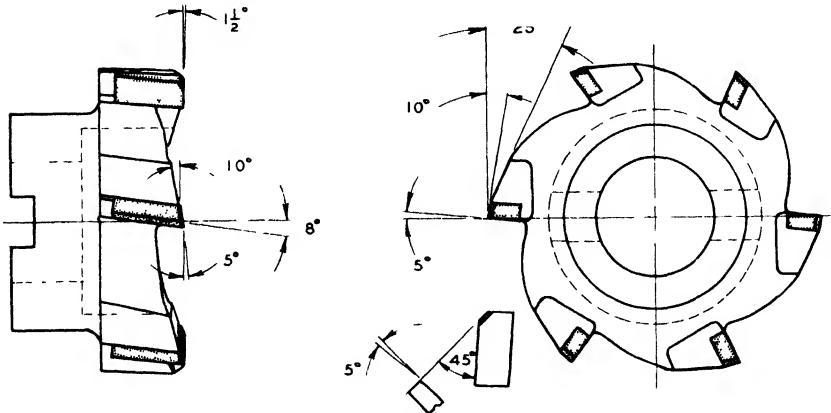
A Typical Shell-Type End Mill with Brazed-on Carbide Tips
